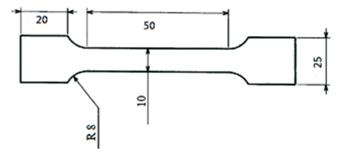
Schematic of a tensile specimen (dimensions in mm).
